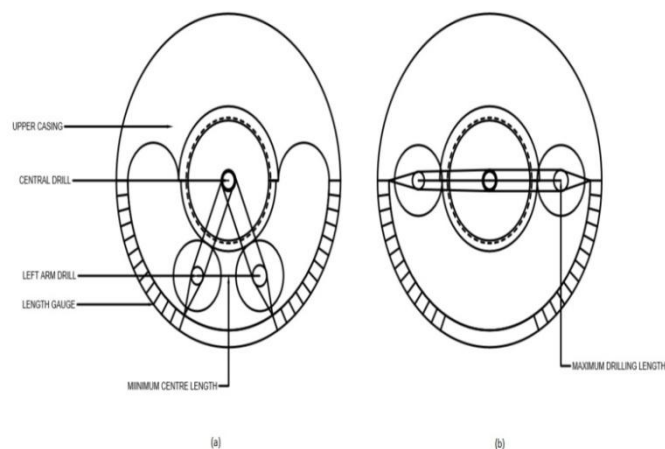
(a) minimum drilling length position, (b) maximum drilling length position
